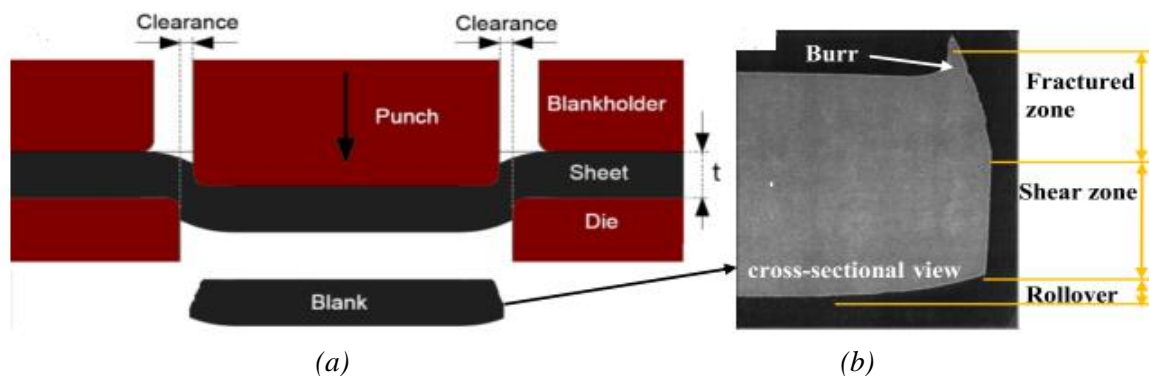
(a) Schematic of sheet metal blanking (b) Front view of sheared edge with different zones [4].
